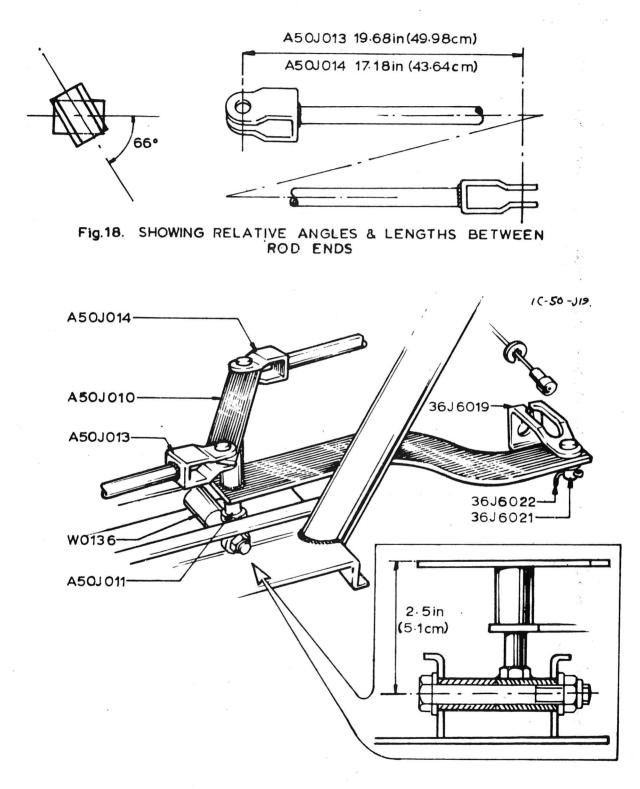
HANDBRAKE LINKAGE & ACTUATING RODS ASSEMBLY
